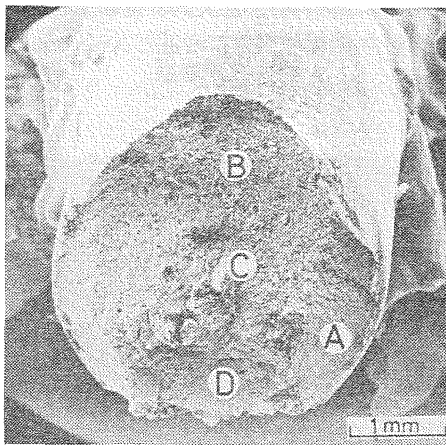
(a) Fracture surface of wire (impact 3-point bending)
